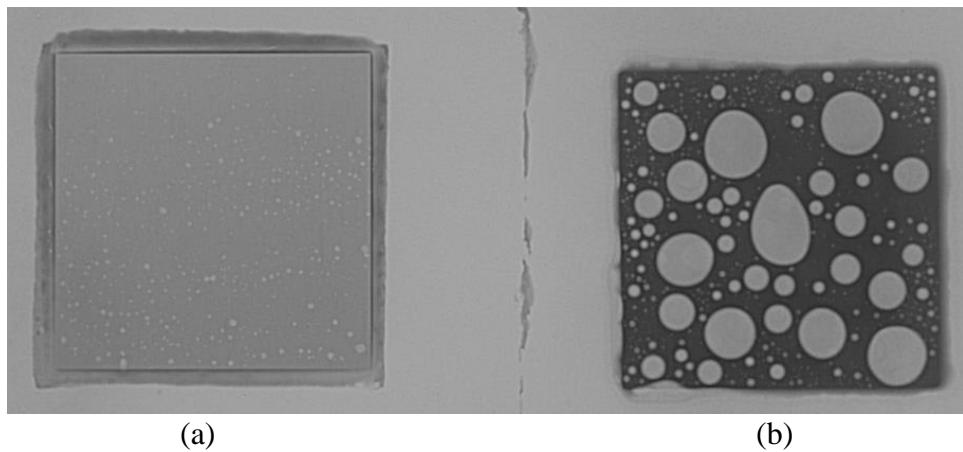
X-ray images of die attach layers for a 10 kV 8.1 mm × 8.1 mm die using (a) pressure-less Ag sintering, and (b) 96.5Sn/3.5Ag solder preform. Image and X-rays courtesy of Tianjin University.
